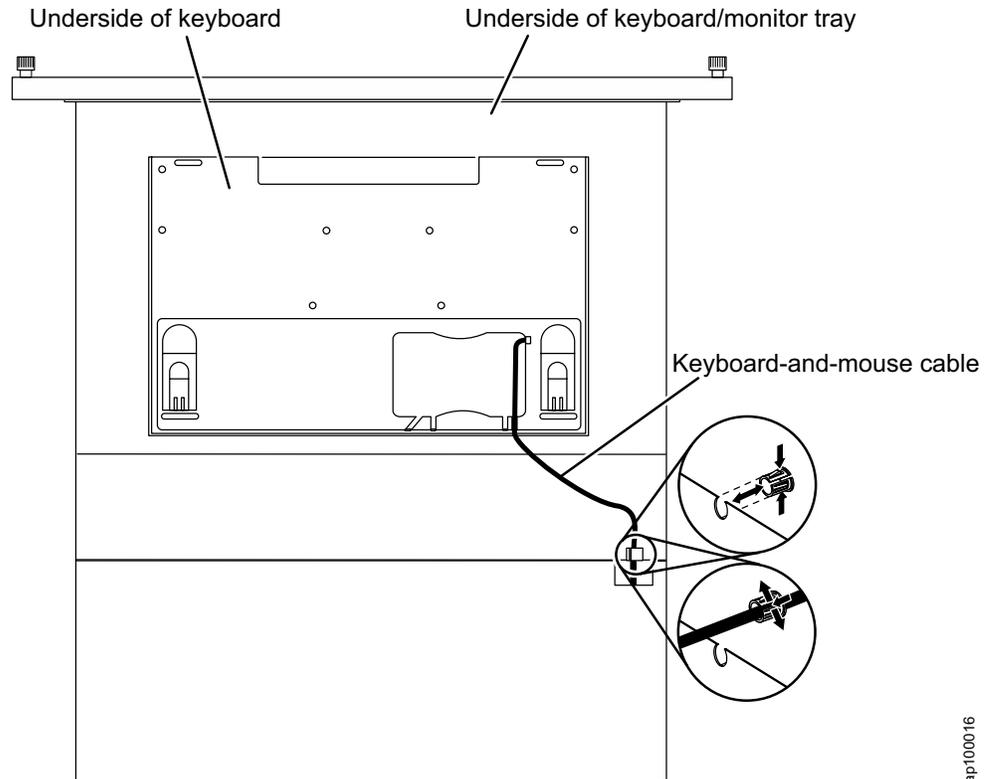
Underside of fully extended keyboard/monitor assembly with focus on bushing and cable routing
